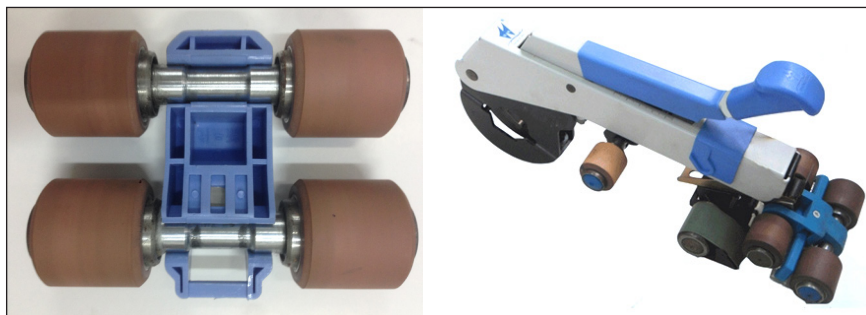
Usual block top roller retaining bar; a) Structure of block top roller retaining bar. b) Installation of block top roller retaining bar.
